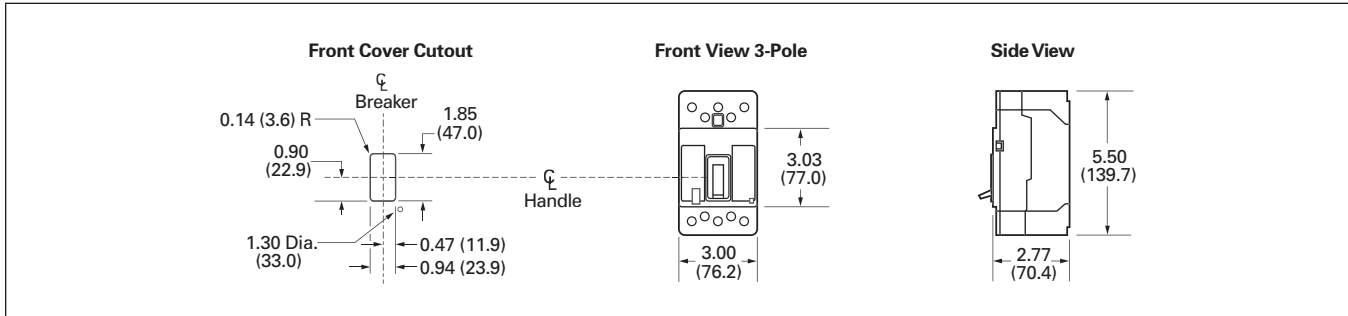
EG-Frame — Dimensions in Inches (mm)
